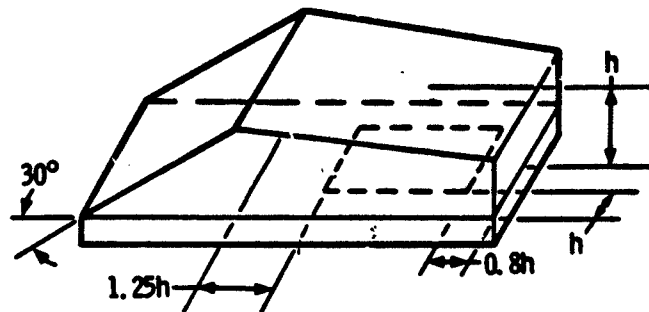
PROPORTIONS OF A TYPICAL EXPLOSIVE ASSEMBLY
